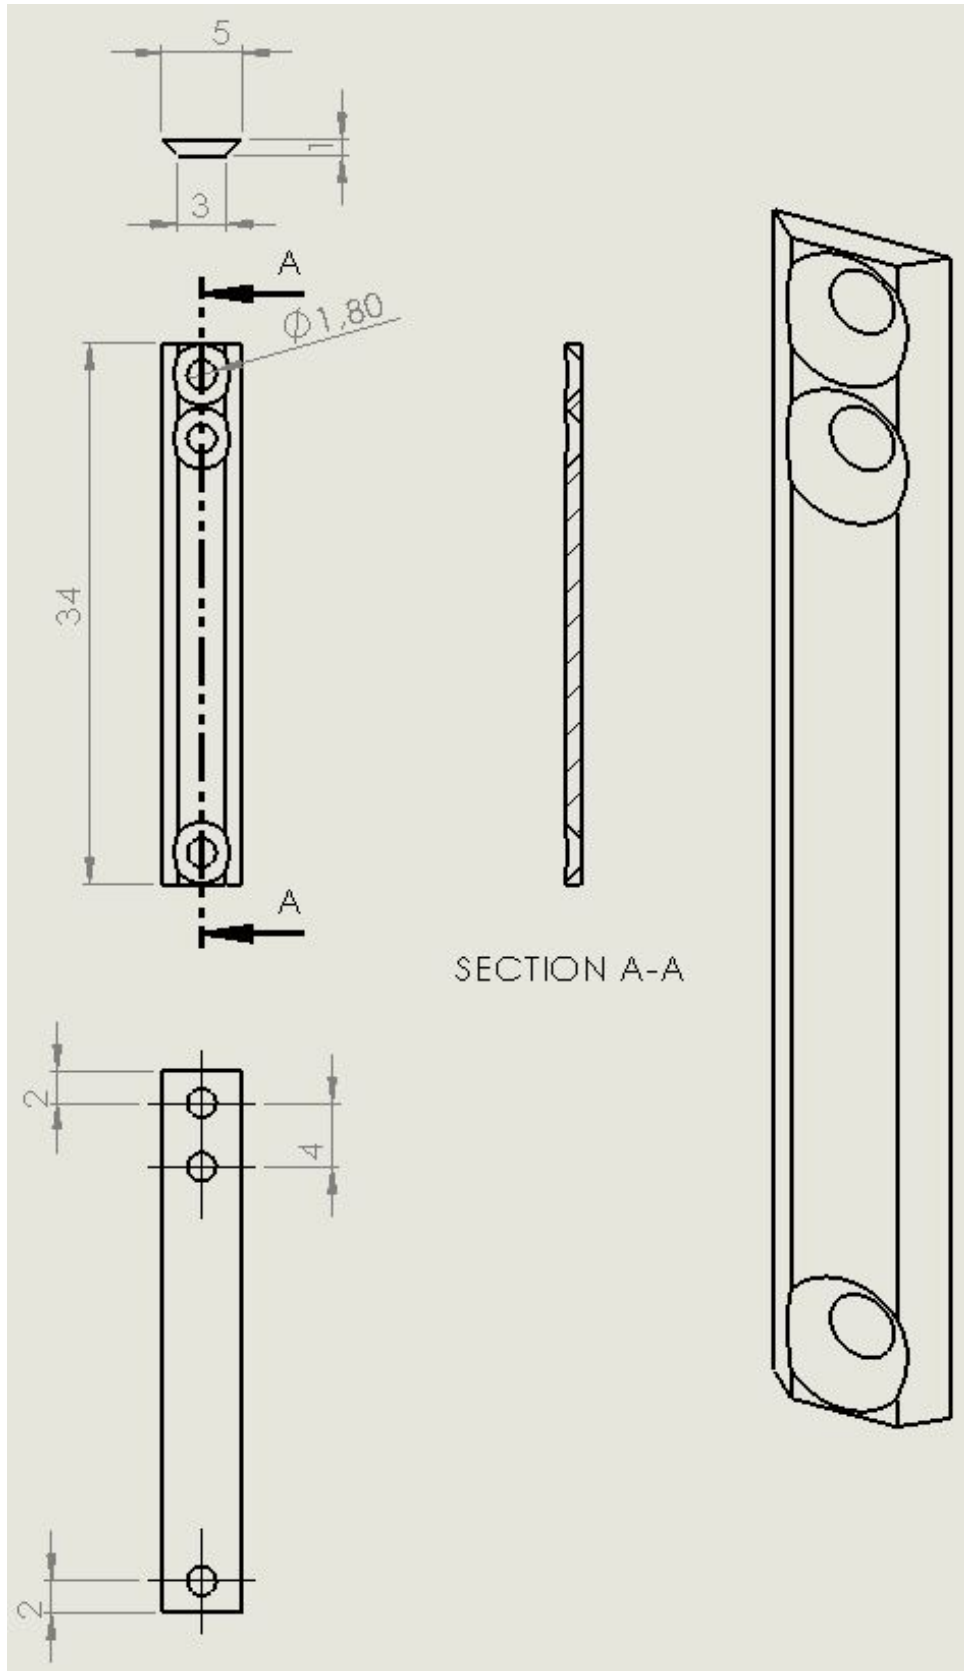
Solidworks model drawing of the rear inner frame bar of the cryostat holder
